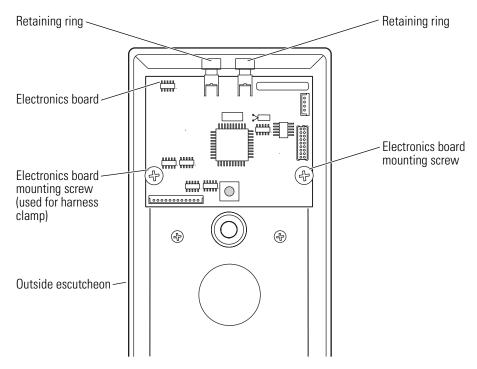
Removing and reinstalling the Keypad EZ control electronics board
